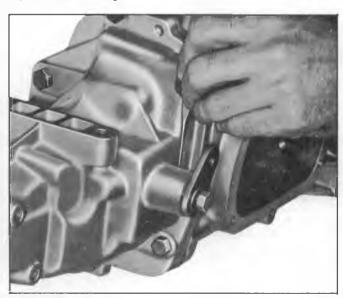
B--Removing Reverse Shifter Shaft Lock Pin
